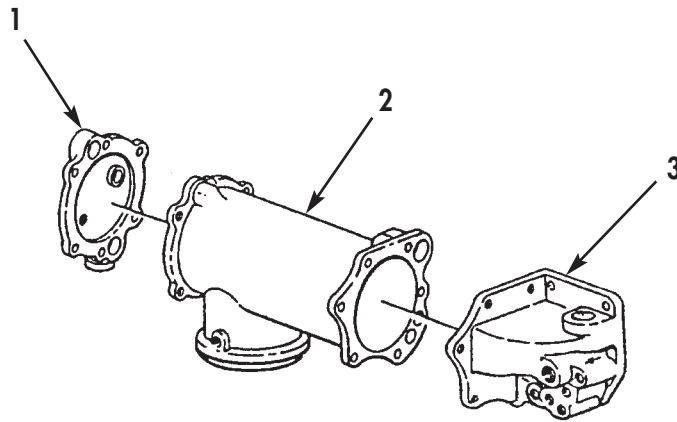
Oil Cooler Cleaning and Inspection—Big Cam I Engine.
